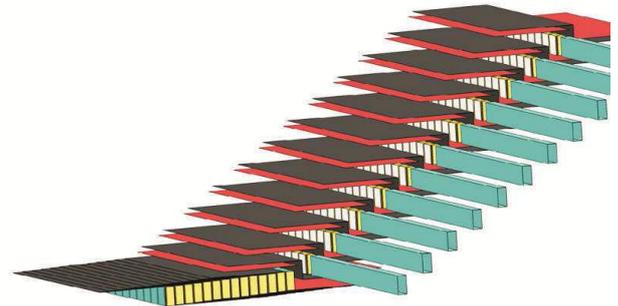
Pattern used to build up the foam and fibers onto the mold prior to resin injection (exploded view) [5].
